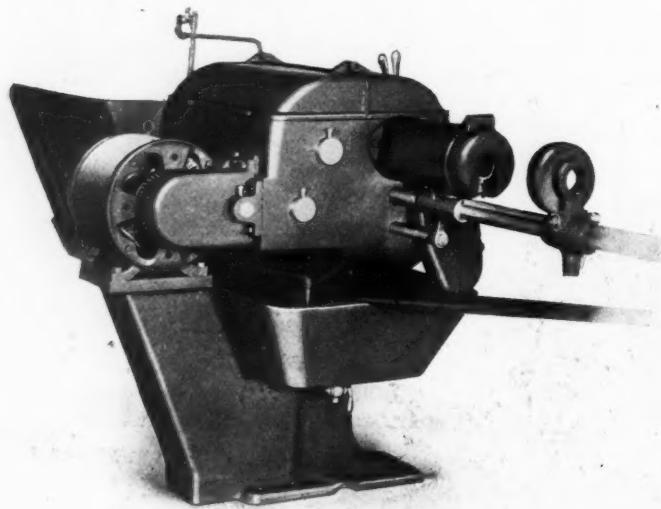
Rear View of Bardons & Oliver Machine, showing Motor Drive
